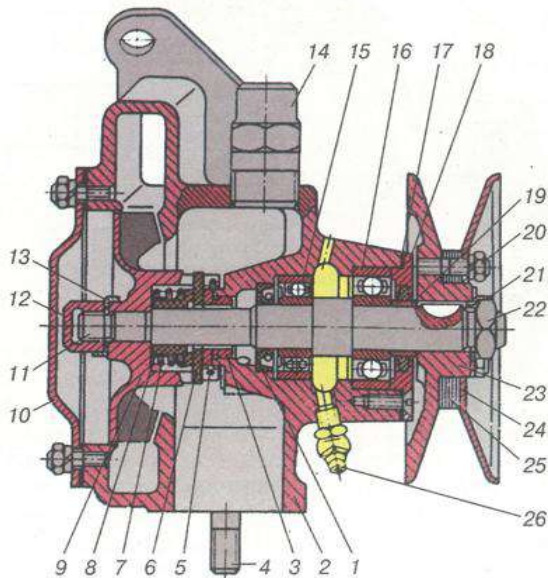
Liquid pump of the YaMZ-238 engine:
